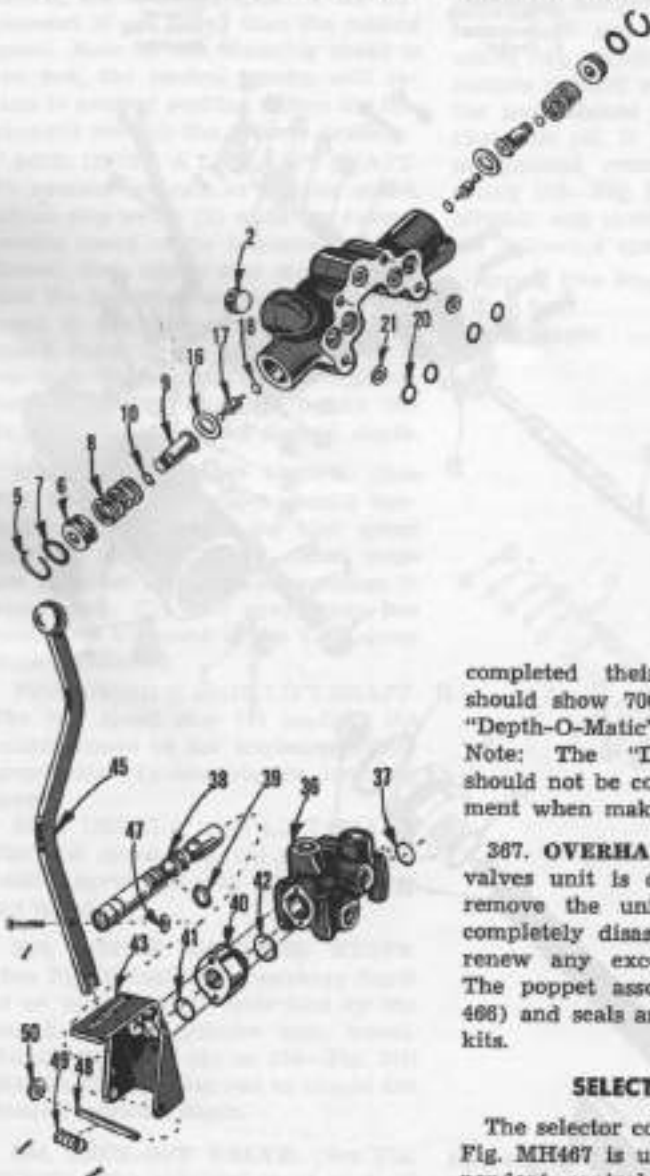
Exploded view of Massey-Harris hydraulic system sequence valve as used with either one or two front cylinders.
